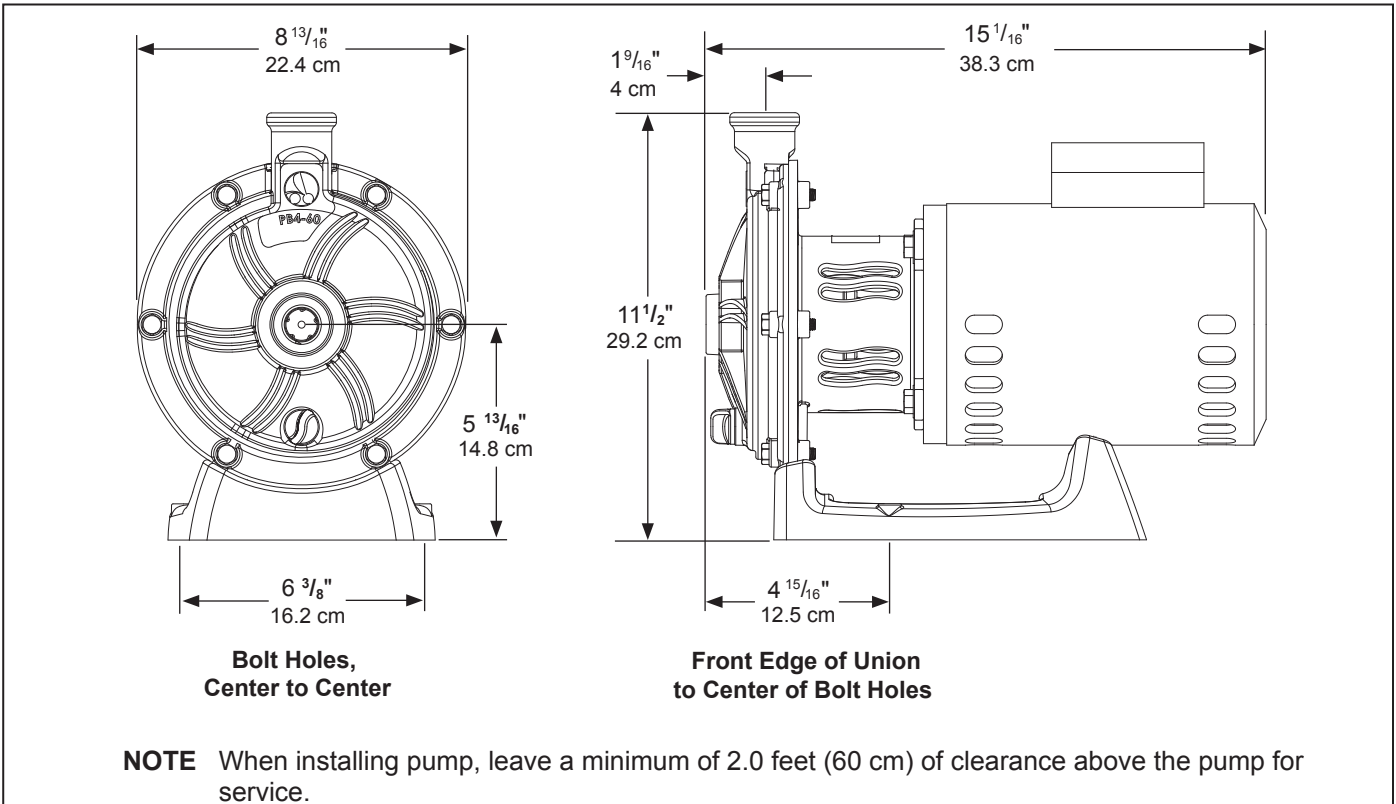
Polaris PB4-60 Booster Pump Dimensions
